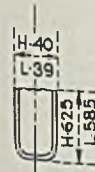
A—First draw, done with tool shown in Fig. 3B. Note tolerances are given all through this series of drawings
